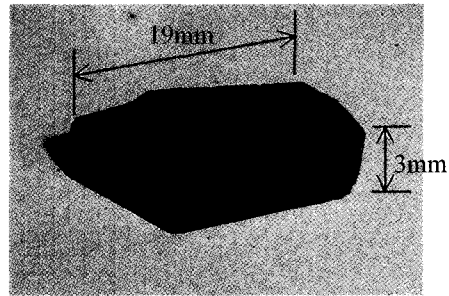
Parts for a milling insert made by metal injection molding from an WC-10Co.
